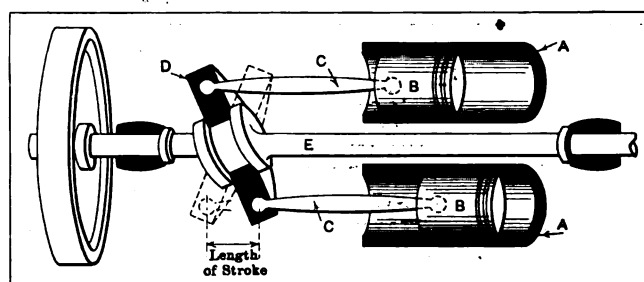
Diagrammatic sketch indicating the principles of a "wobble-gear" engine
